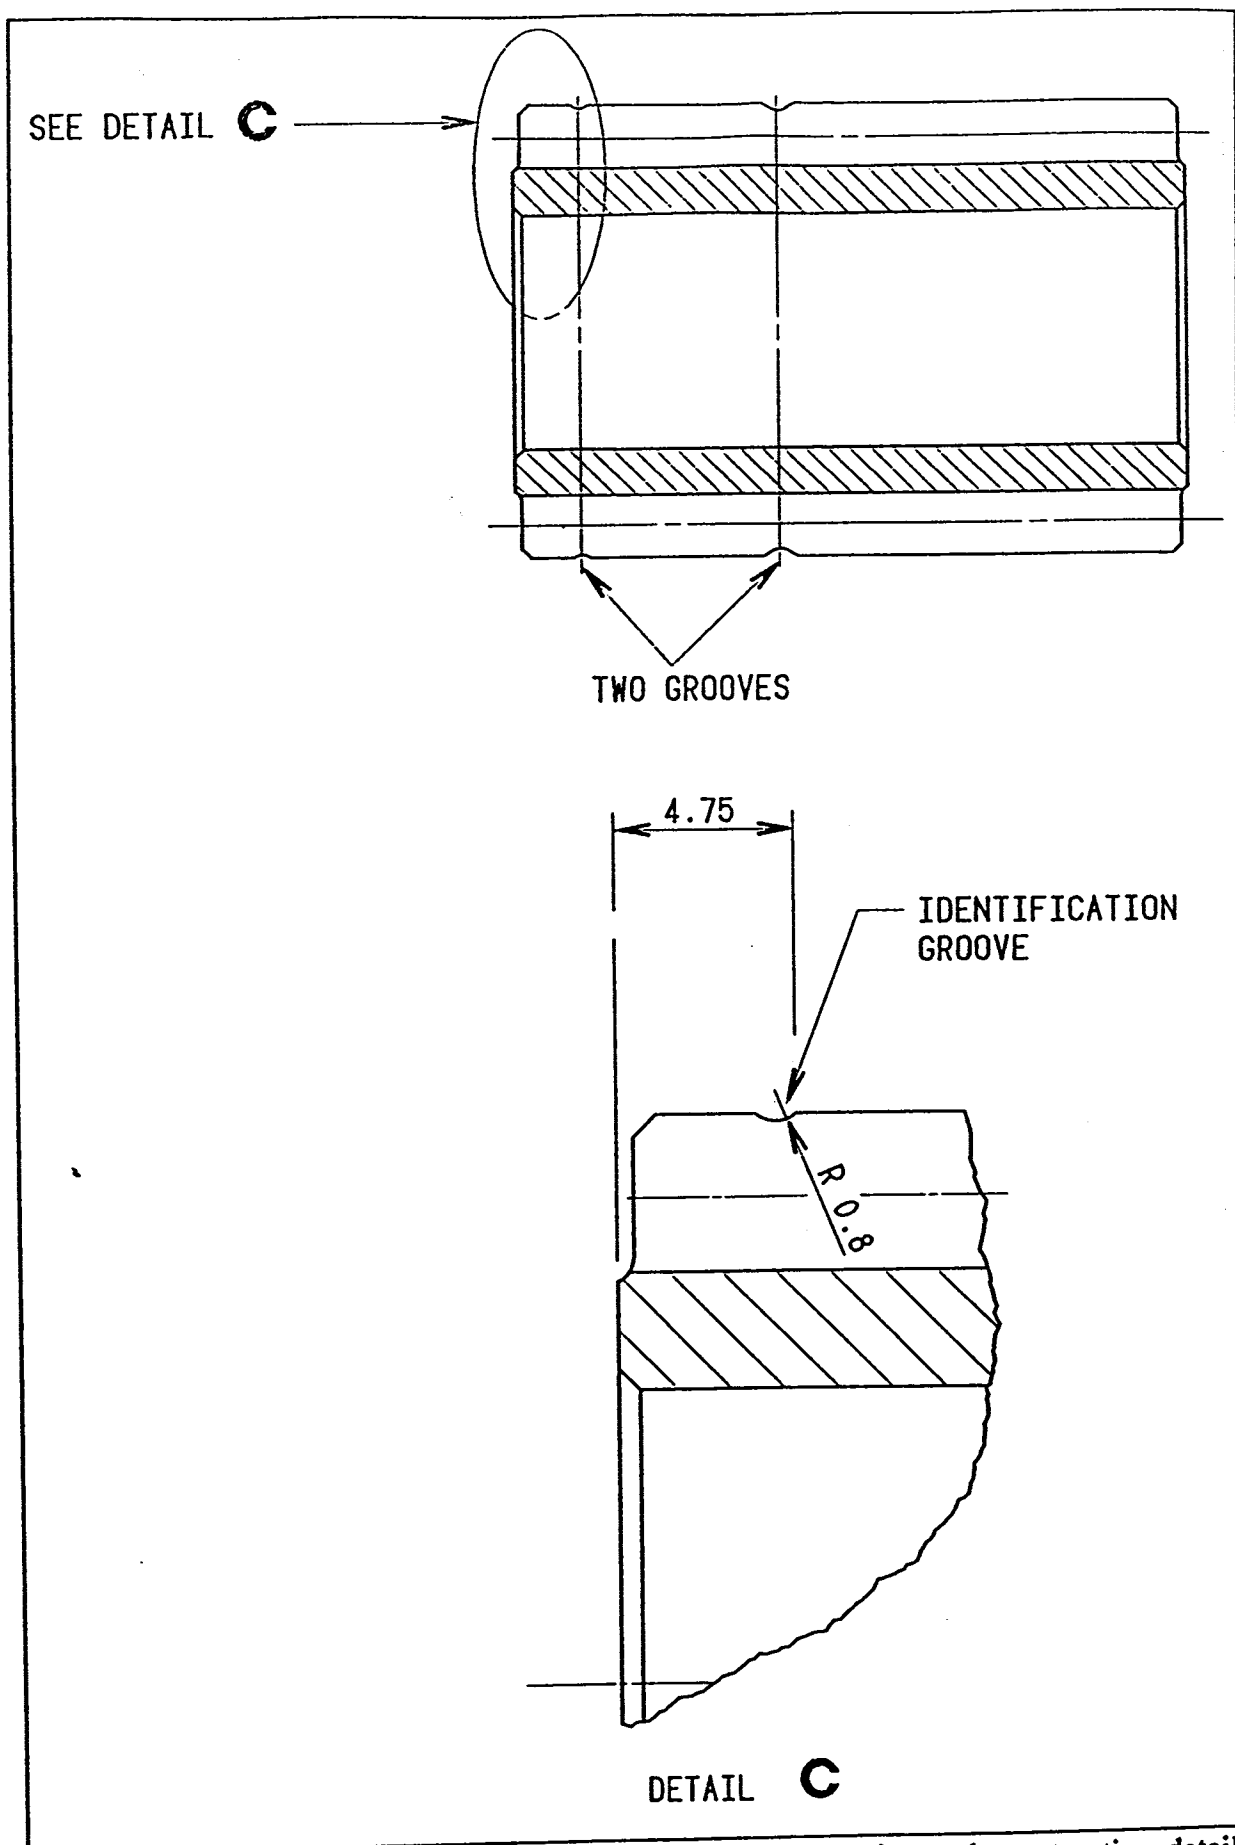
Sketch of the long planet pinion showing the location and construction details of the groove identifying the new design.
